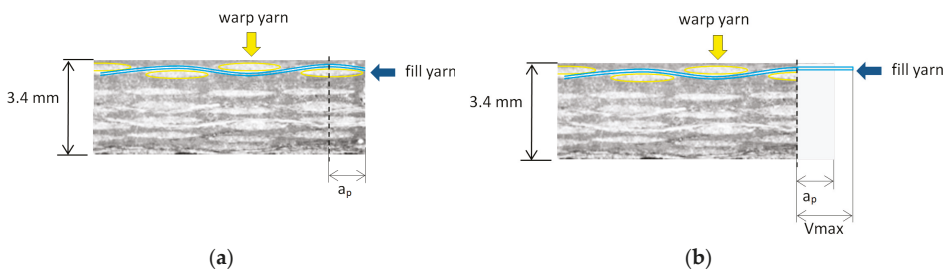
(a) Depth of cut (ap) before machining; (b) Vmax and ap after machining.
